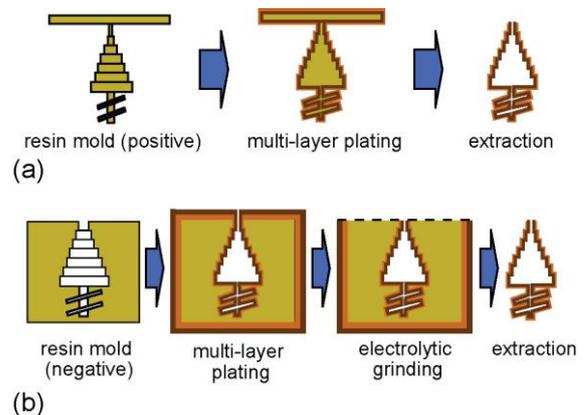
Micromolding processes for micro capsule using (a) a positive-type resin mold, and (b) a negative-type resin mold.
